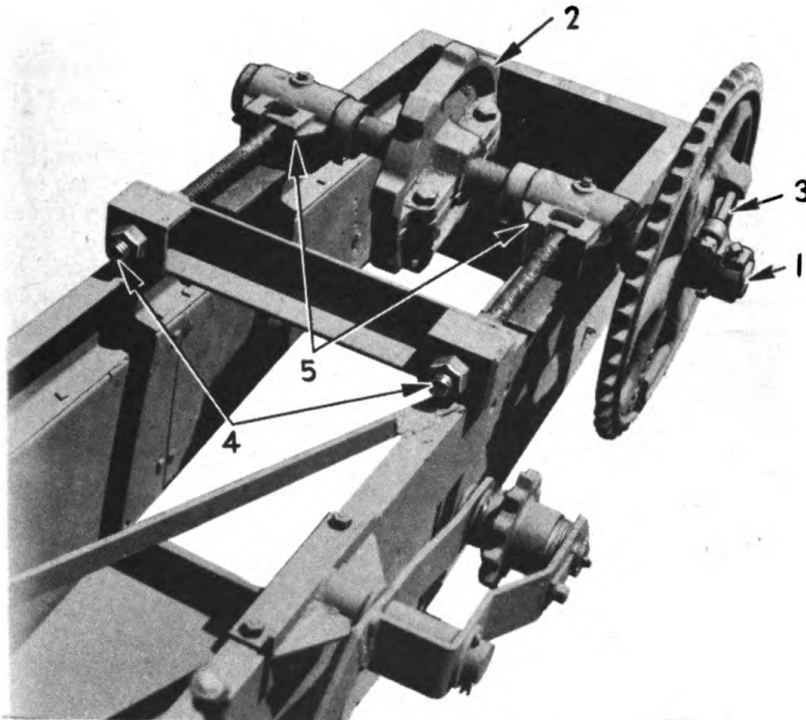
CLOSE-UP OF HEAD END OF COLD ELEVATOR.
